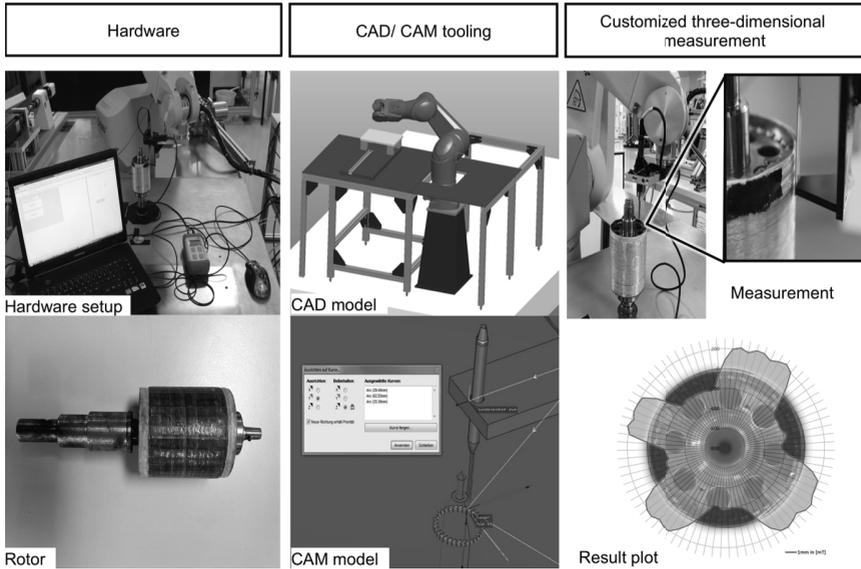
The ROBOTESLA performs free three-dimensional measurements over a specimen.
